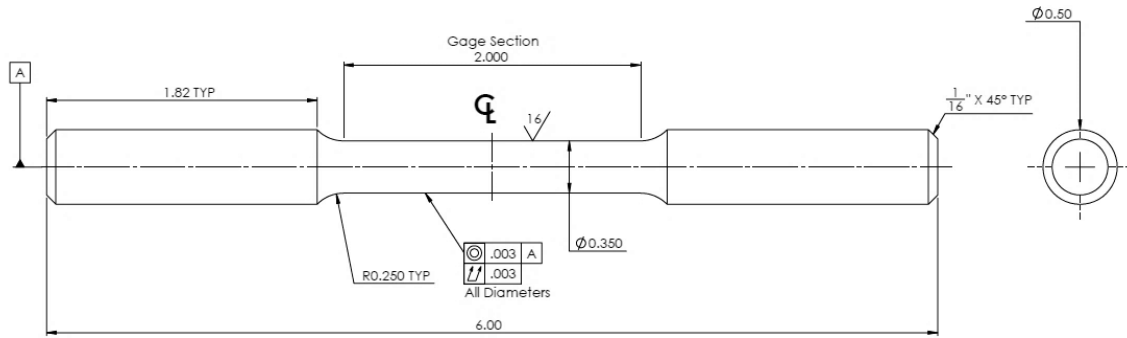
Room temperature cross-weld tensile specimen geometry.
